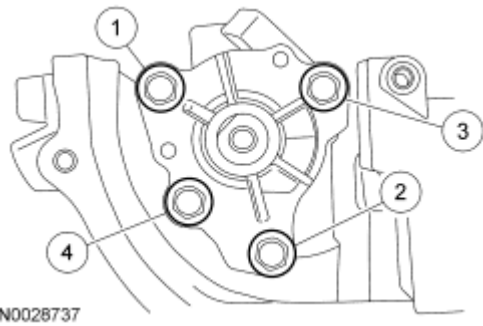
Identifying Tightening Sequence Of Oil Pump Assembly Bolts
